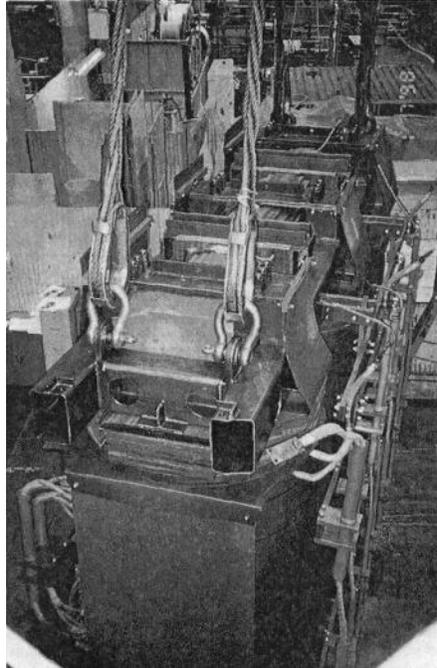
Top view of clamping frame for a 3-phase transformer (Del Vecchio [1]).
